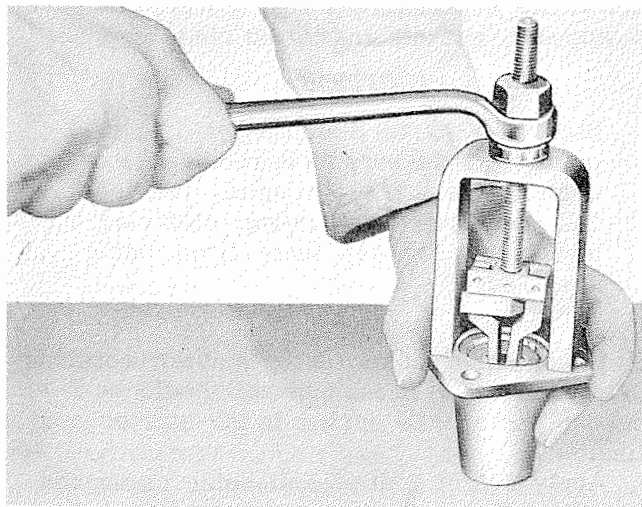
Pulling Fuel Pump Drive Shaft Oil Seal
